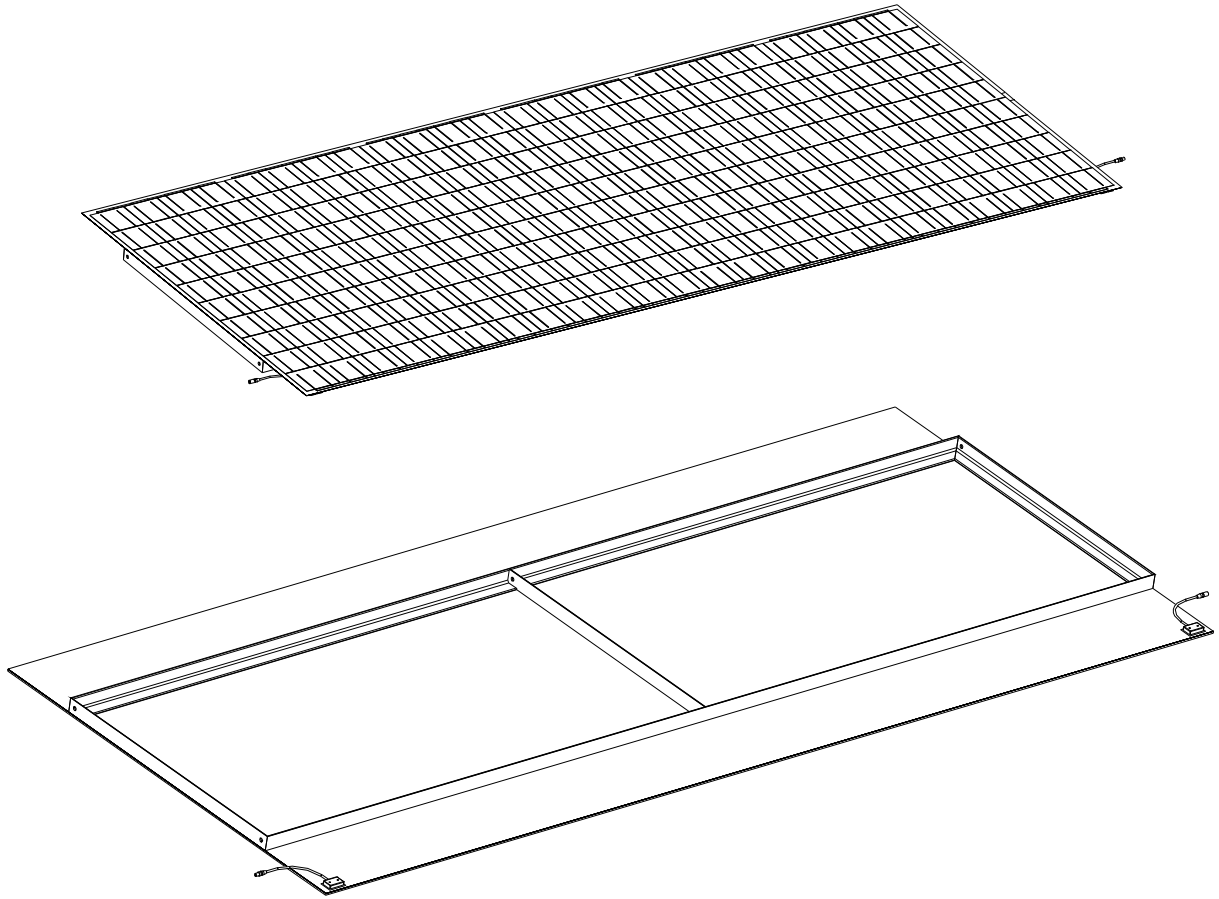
Isometric CAD views of the front (top) and back (bottom) of the 1.58 m x 3.68 m Brightfield module design, showing the cantilevered laminate and steel frame.
